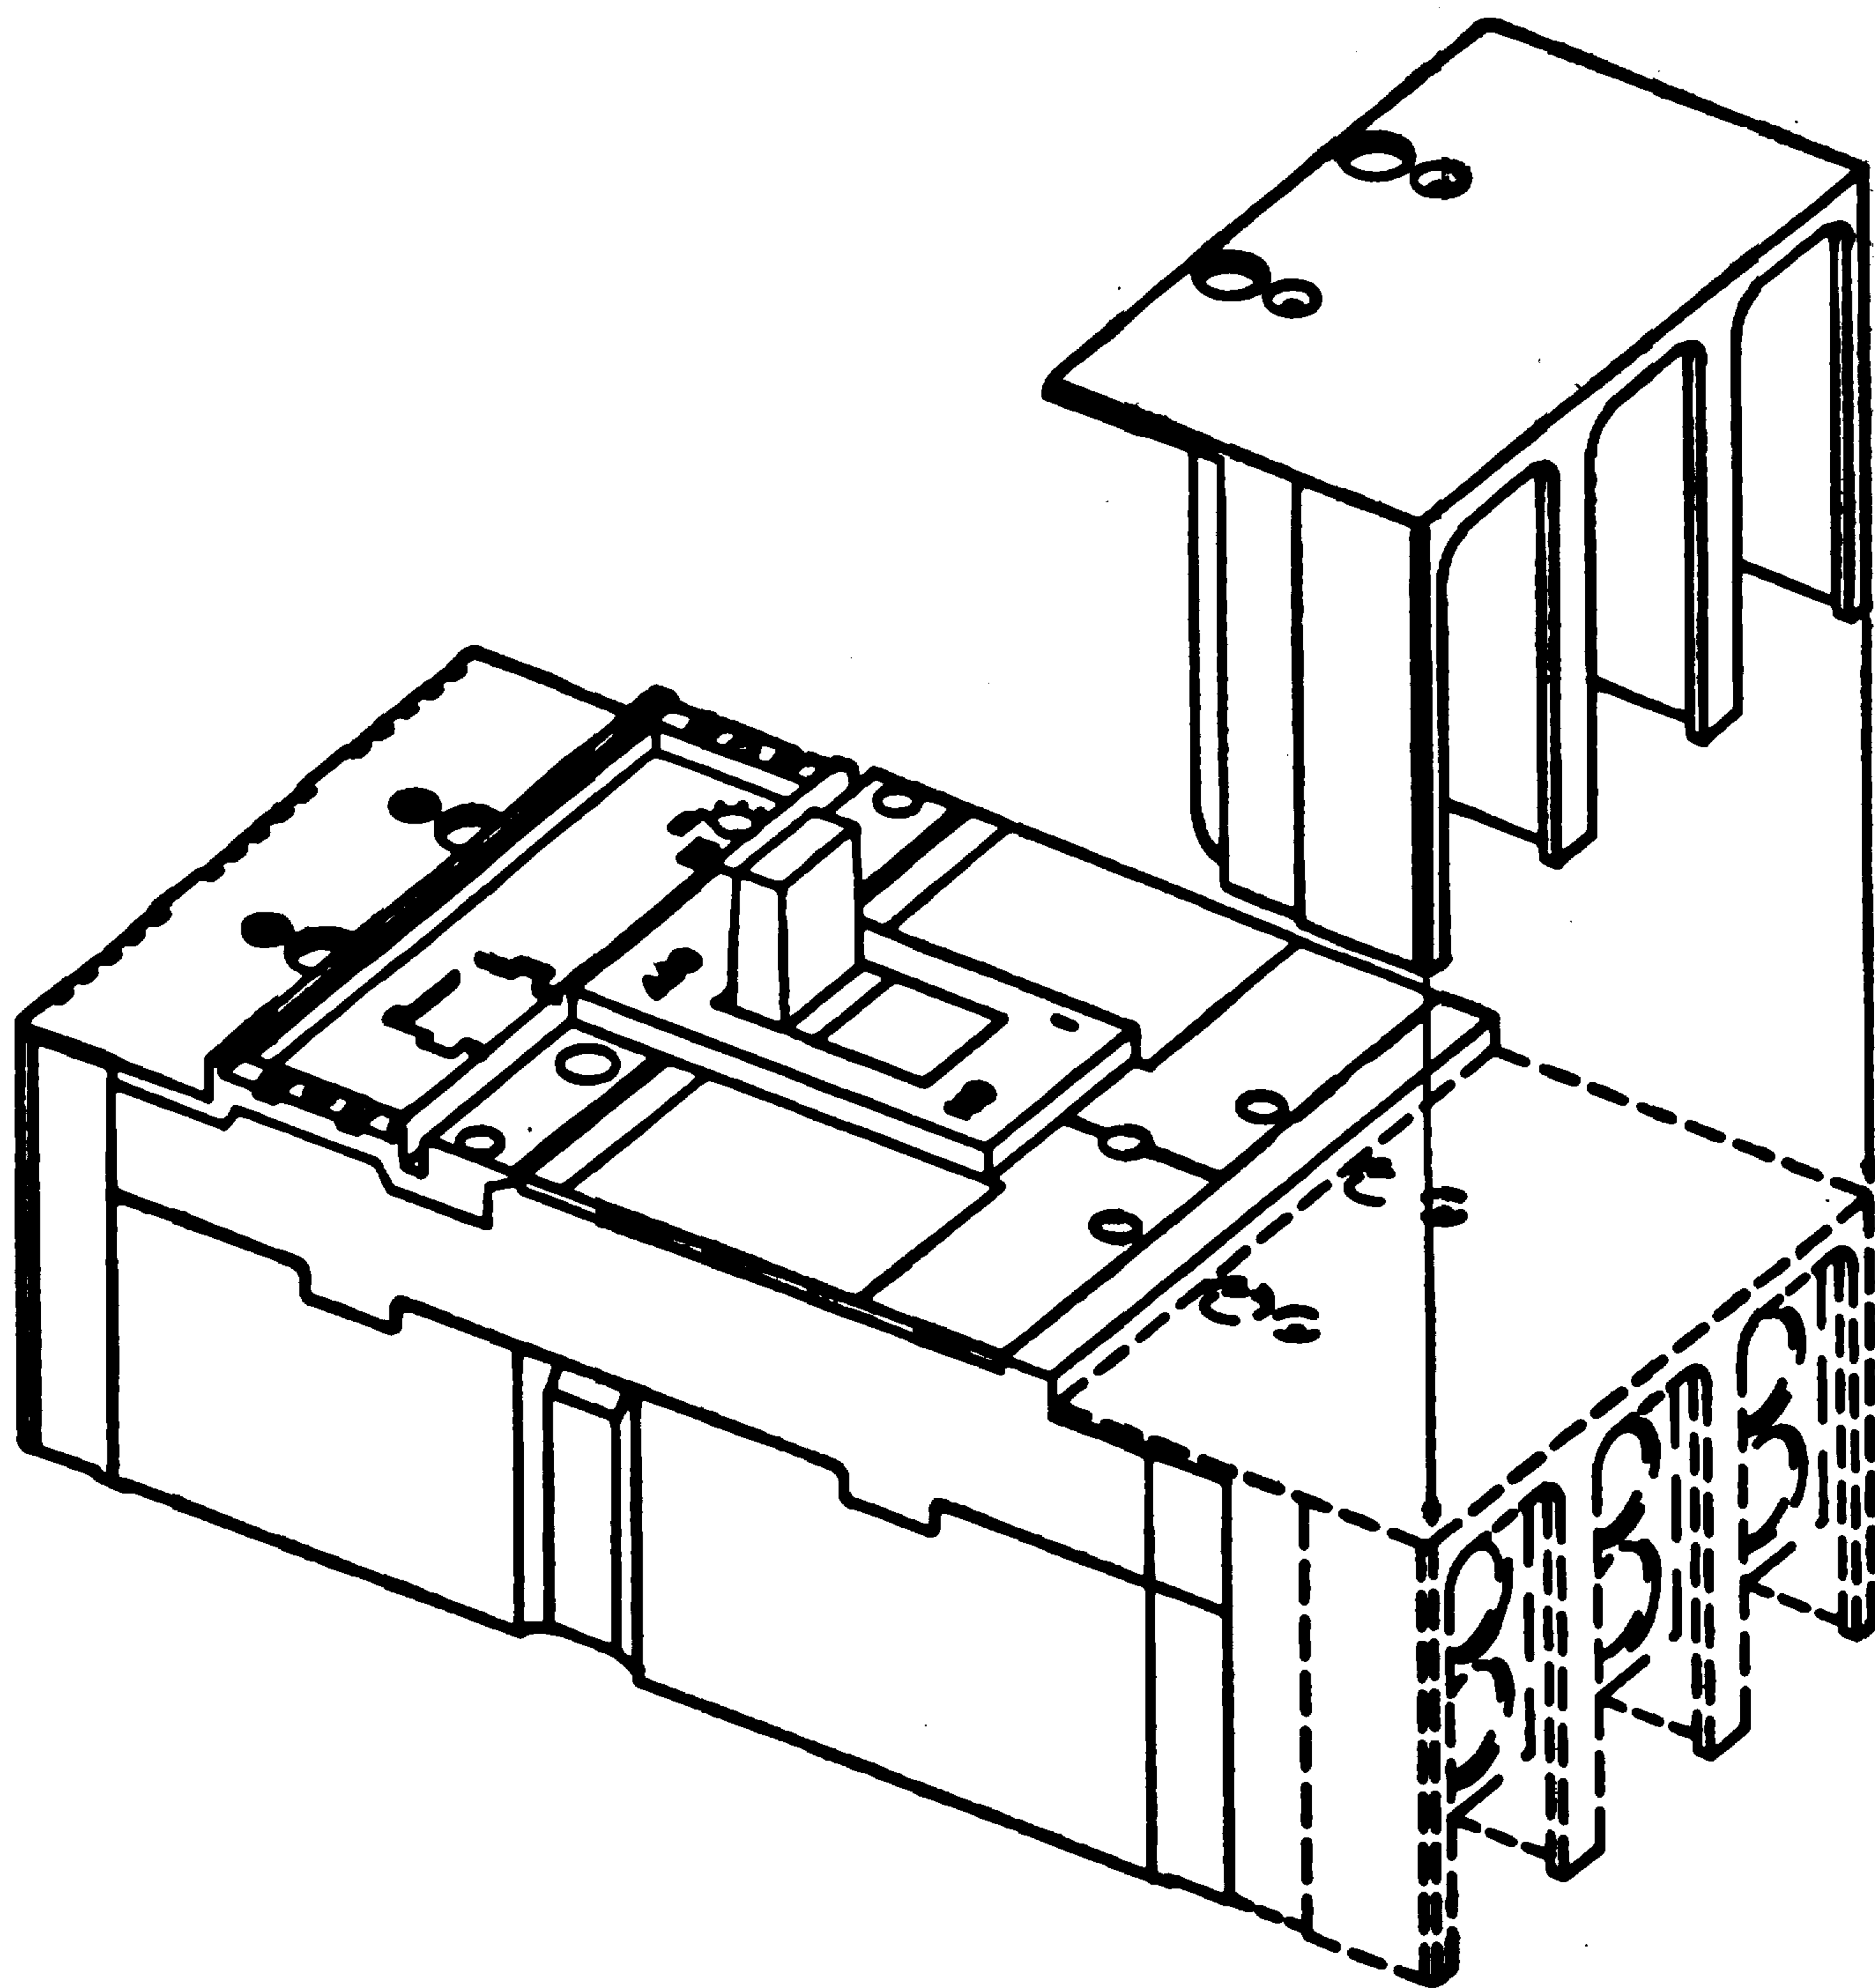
Installation of the lug cover provided in the kit. Install as shown to maintain electrical clearances.
